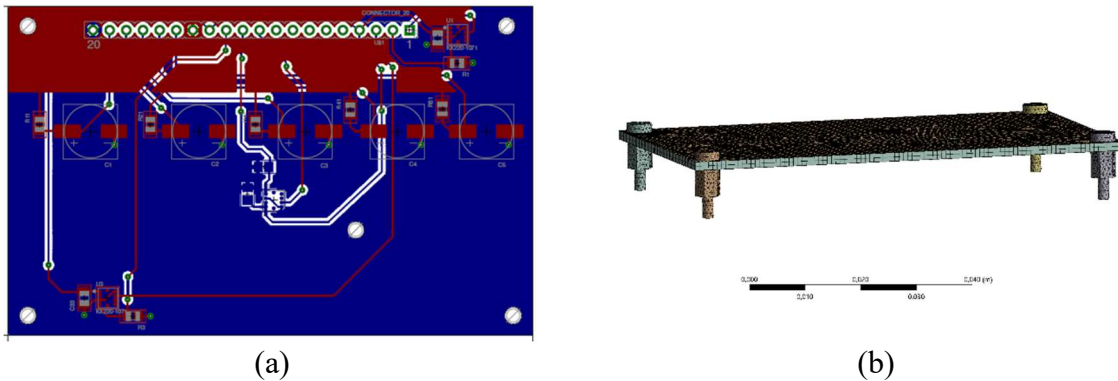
(a) Plan of copper layers of the PCB, (b) FE model of the PCB with bolted joints
